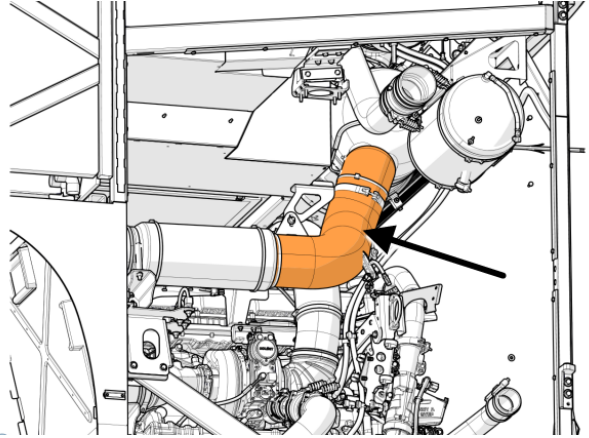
REINSTALL THIS EXHAUST PIPE SECTION
